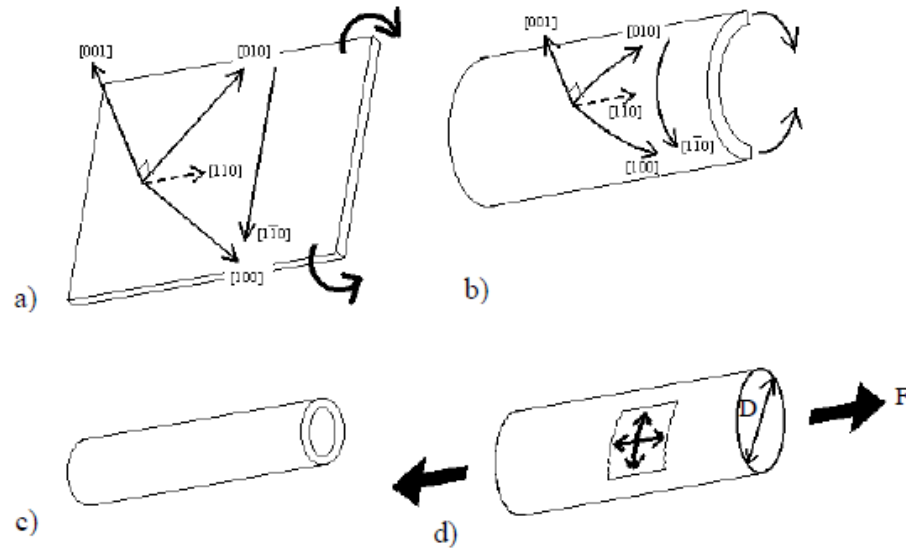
Auxetic tube formed from bending a thin textured Galferol sheet. (a) A $\langle 110 \rangle \{100\}$ oriented sheet. (b) Rolling this sheet over. (c) Auxetic tube formed by joining the edges of the sheet and possibly even welding them together. (d) A finished tube under tensile load which causes an increase in its circumference [15].
